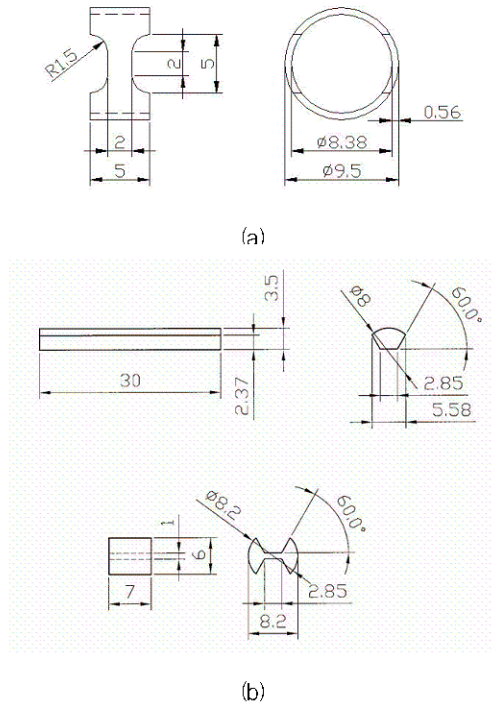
Specimen and device (a) Ring tensile specimen (b) Pin and central piece (mm)
